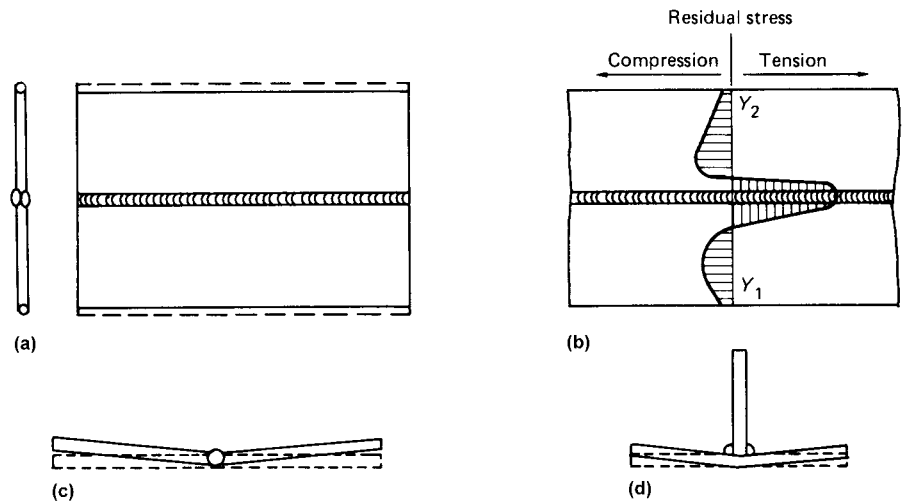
Dimensional changes occurring in weldments. (a) Transverse shrinkage in a groove weld. (b) Longitudinal shrinkage in a groove weld. Distribution of longitudinal residual stress, σ_x , is also shown. (c) Angular change in a groove weld. (d) Angular change in a fillet weld. Source: Welding Research Council
